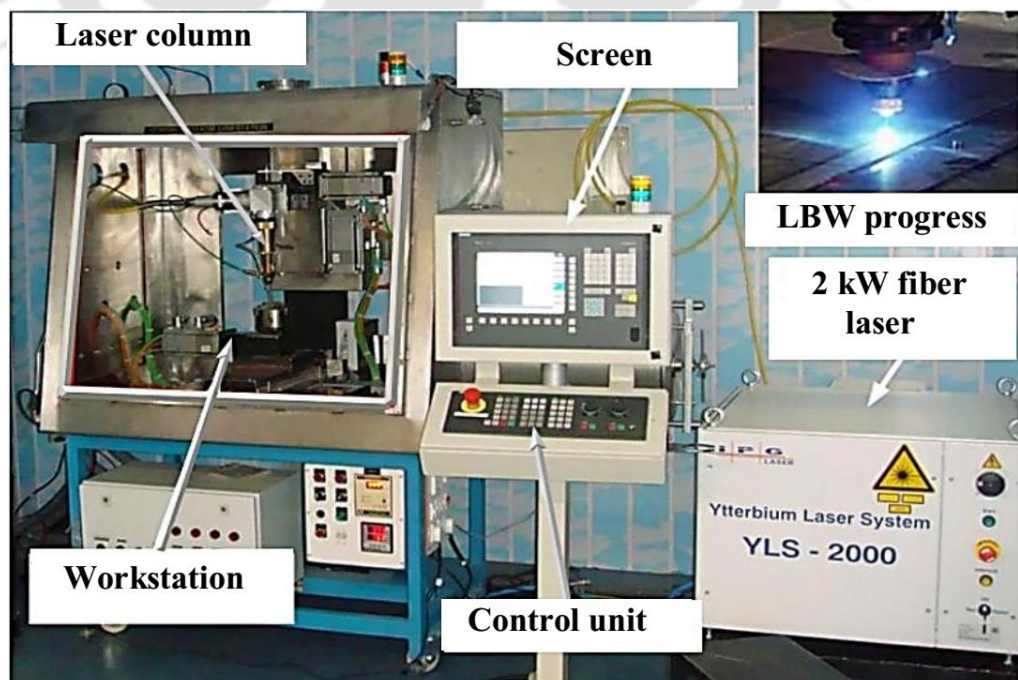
Photograph of fiber laser beam welding experimental set up
